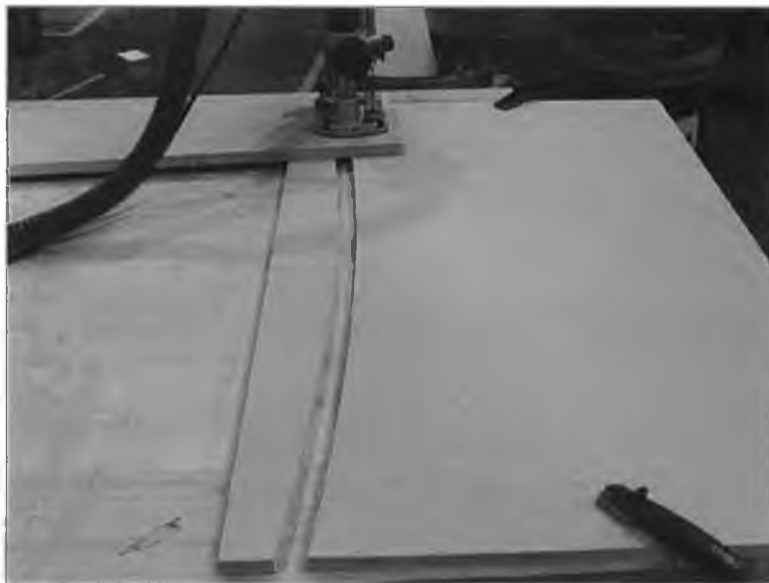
CONCAVE SHELF JIG BEING CONSTRUCTED
